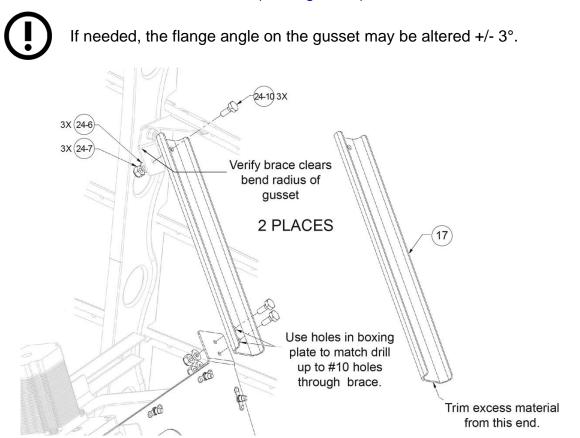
Attaching Bracket Assembly Braces (Right Side Shown)
